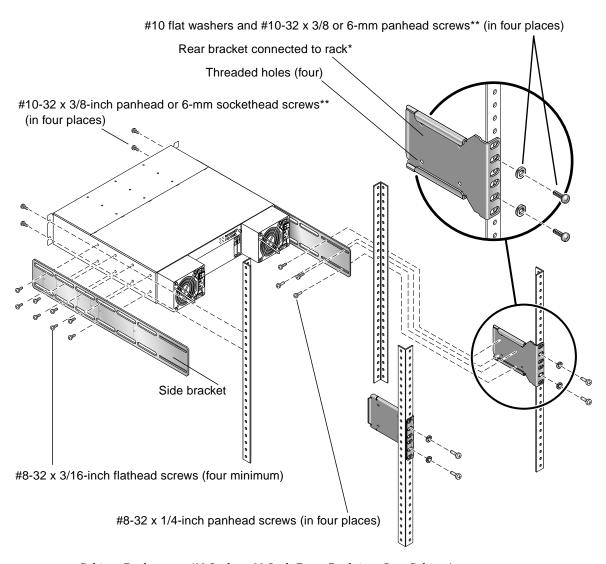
Cabinet Rackmount (22-Inch to 28-Inch Deep Rack in a Sun Cabinet)
